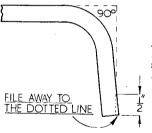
Showing how the saw frame is adapted for fitting the attachment
